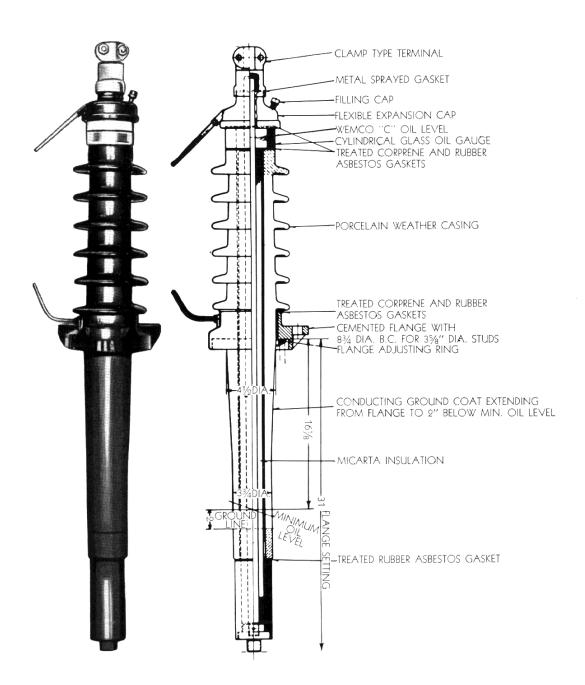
600 Amp., 34.5 KV Oil Filled Terminal Bushing for Type BJO-B Breakers
